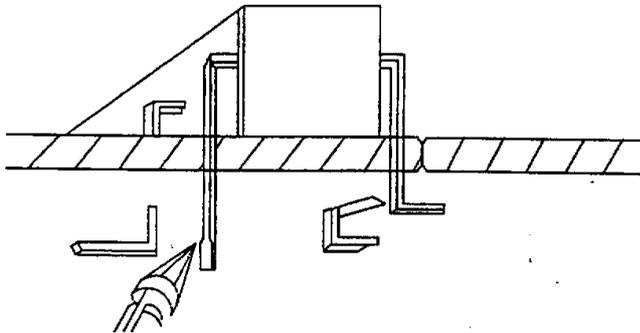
USE SOLDERING IRON TO PRY LEADS
